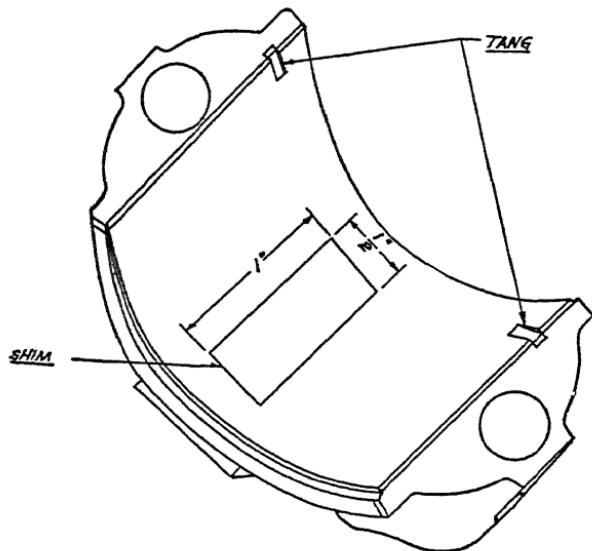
Pontiac (1937) Connecting Rod Bearing Cap with
